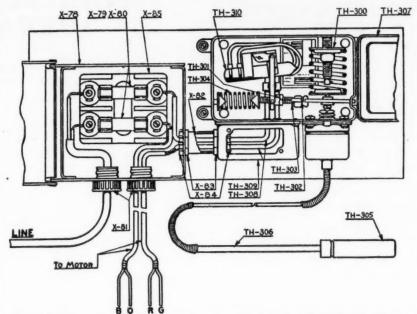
Cross sectional drawing of the Socold Mercoid thermostat.
